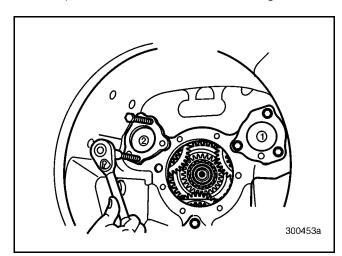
Removing No. 2 Front Countershaft Front Bearing Cover
